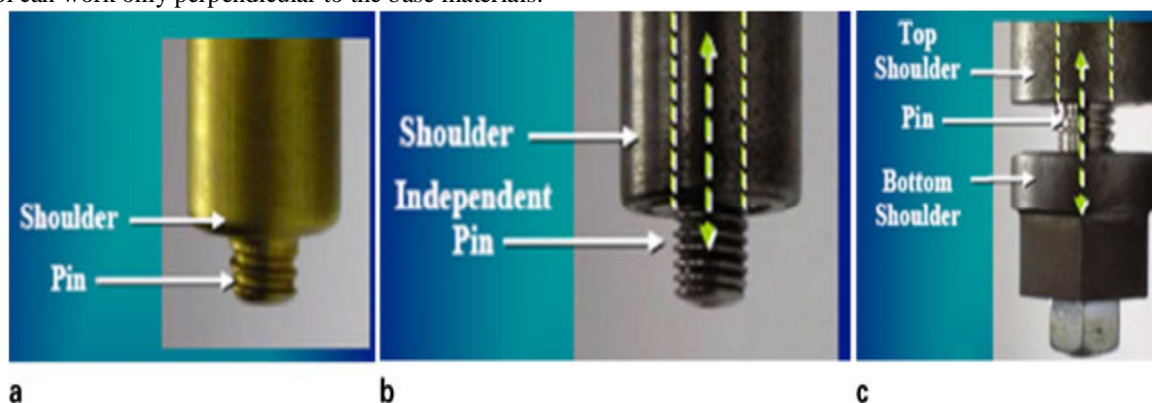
(a) Fixed, (b) adjustable (c) bobbin type tools [37]
